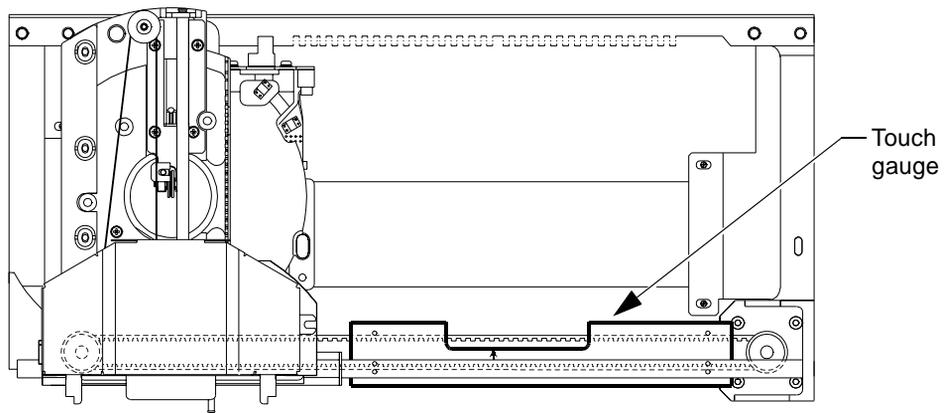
Horizontal Belt Touch Gauge Installation
